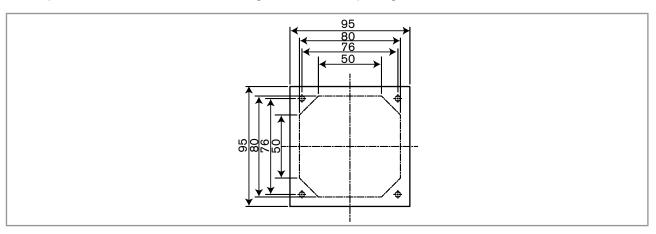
Dimensions [mm] of the electrical cabinet frontage cutting plan
